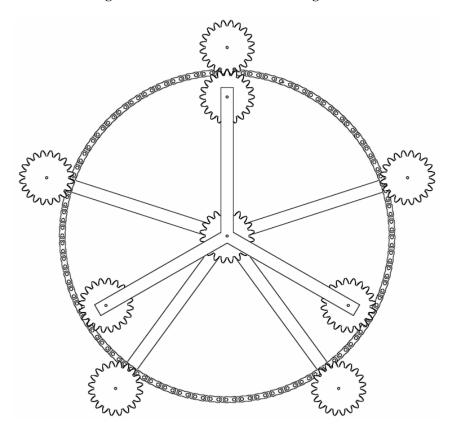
New Proposed Embodiment at a Ratio Expressing the Non-Integer Tooth Problem
